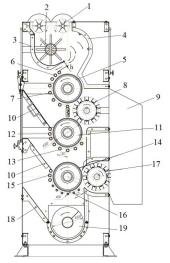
Scheme of the proposed purifier of raw cotton machine collection
